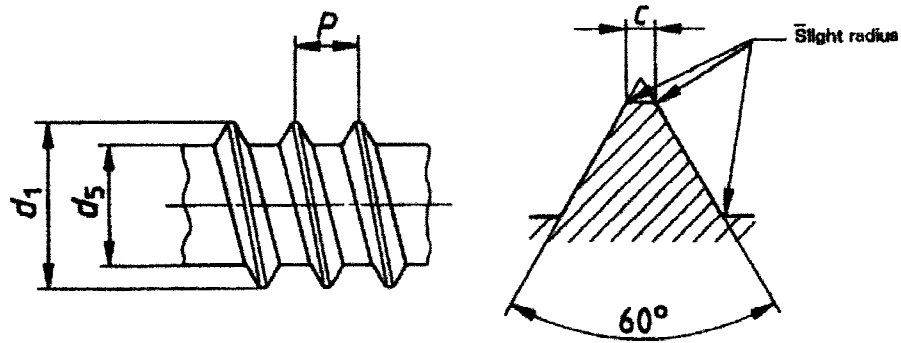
Schematic of HC Screw Thread Dimensions (Table A5.2)
